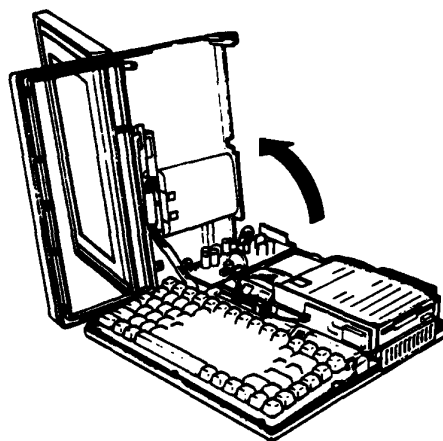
Removing the Top Cover Assembly from the Base Subassembly
